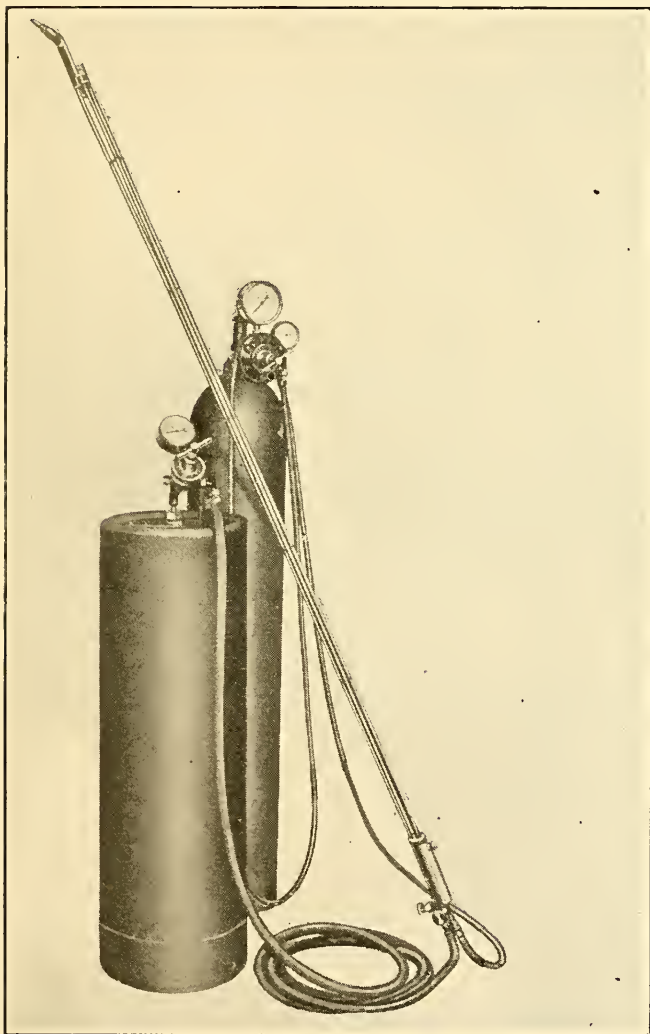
The Oxweld Staybolt Cutting-Torch.
